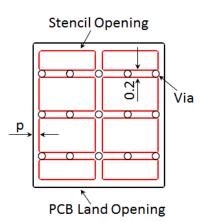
Stencil Openings Shall not Cover Via Areas If Possible (Dimensions are in mm)
